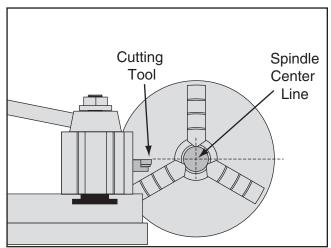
Cutting tool aligned with spindle centerline (viewed from tailstock).
